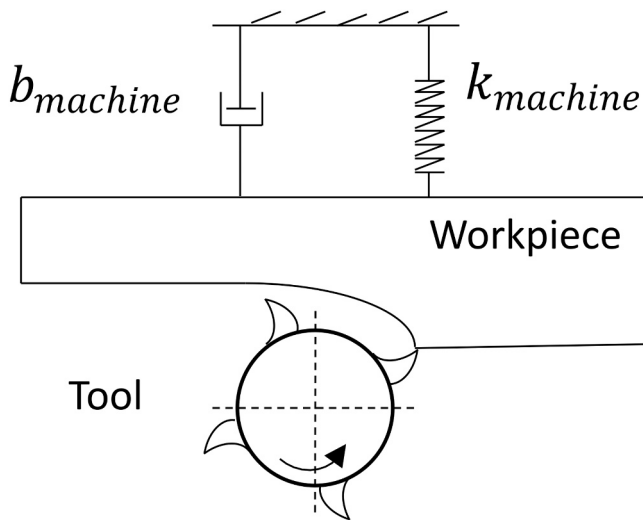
SDOF representation of a flexible machine tool which has an equivalent damping and stiffness of $b_{machine}$ and $k_{machine}$, milling a rigid workpiece with a rigid tool.
